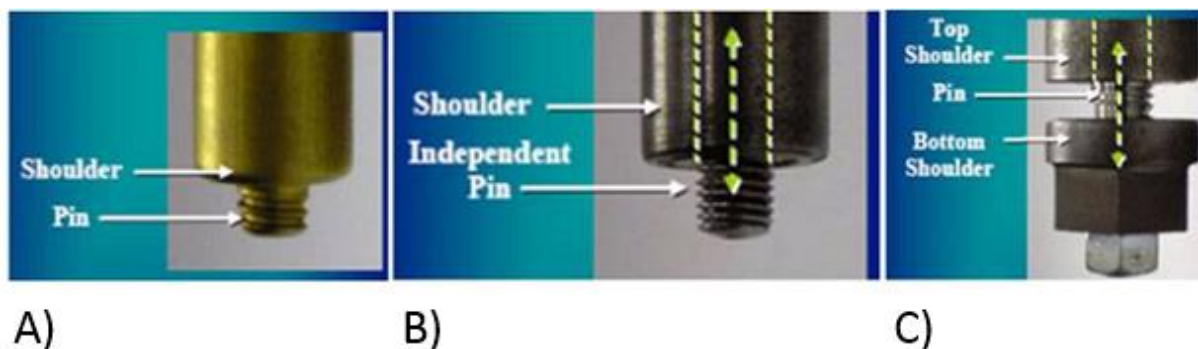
(a) Fixed pin, (b) Adjustable pin and (c) Bobbin tool types [32]
